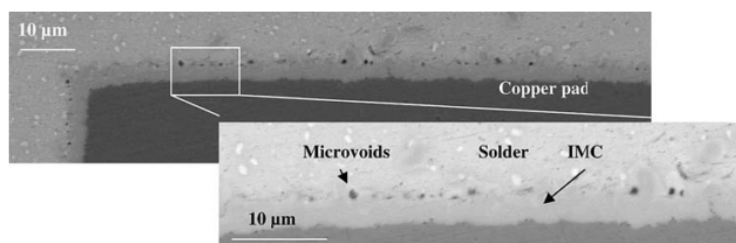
Immersion silver pad finish with Sn-3.0Ag-0.5Cu solder joint; microvoids were found at the interface of solder and IMC layer [10].
